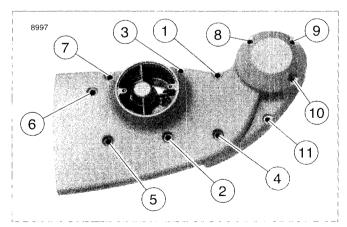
Gearcase Cover Mounting Screw Torque Sequence
